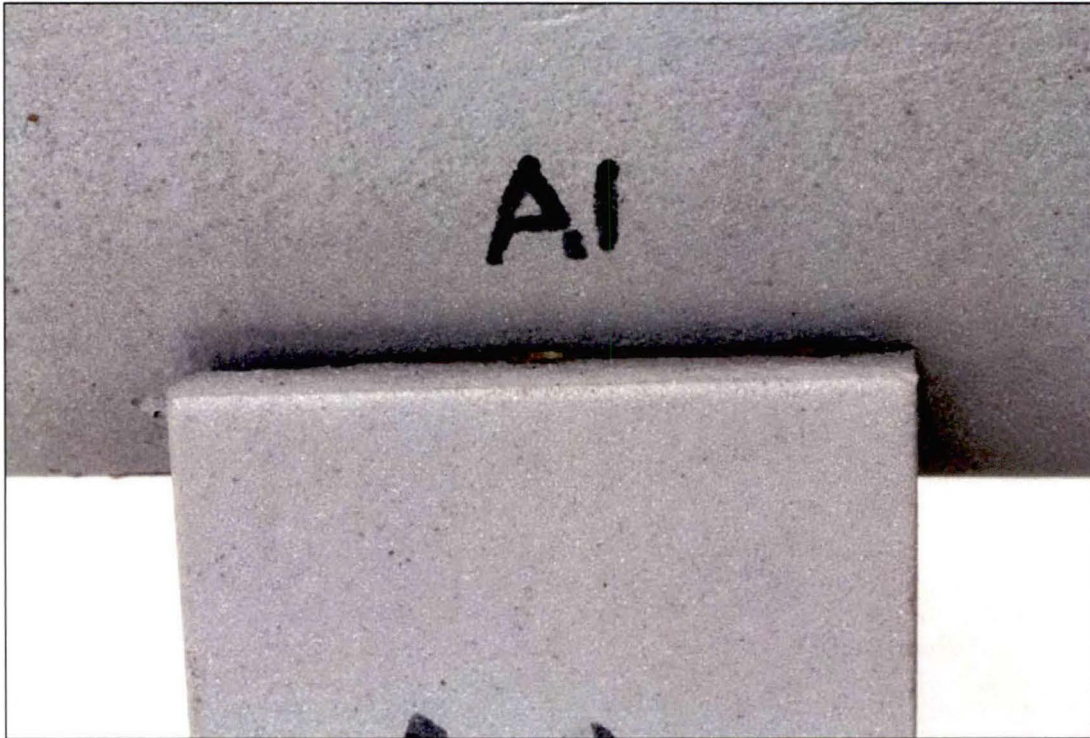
Image of the Lug A1 exterior bottom joint region which was not welded.
